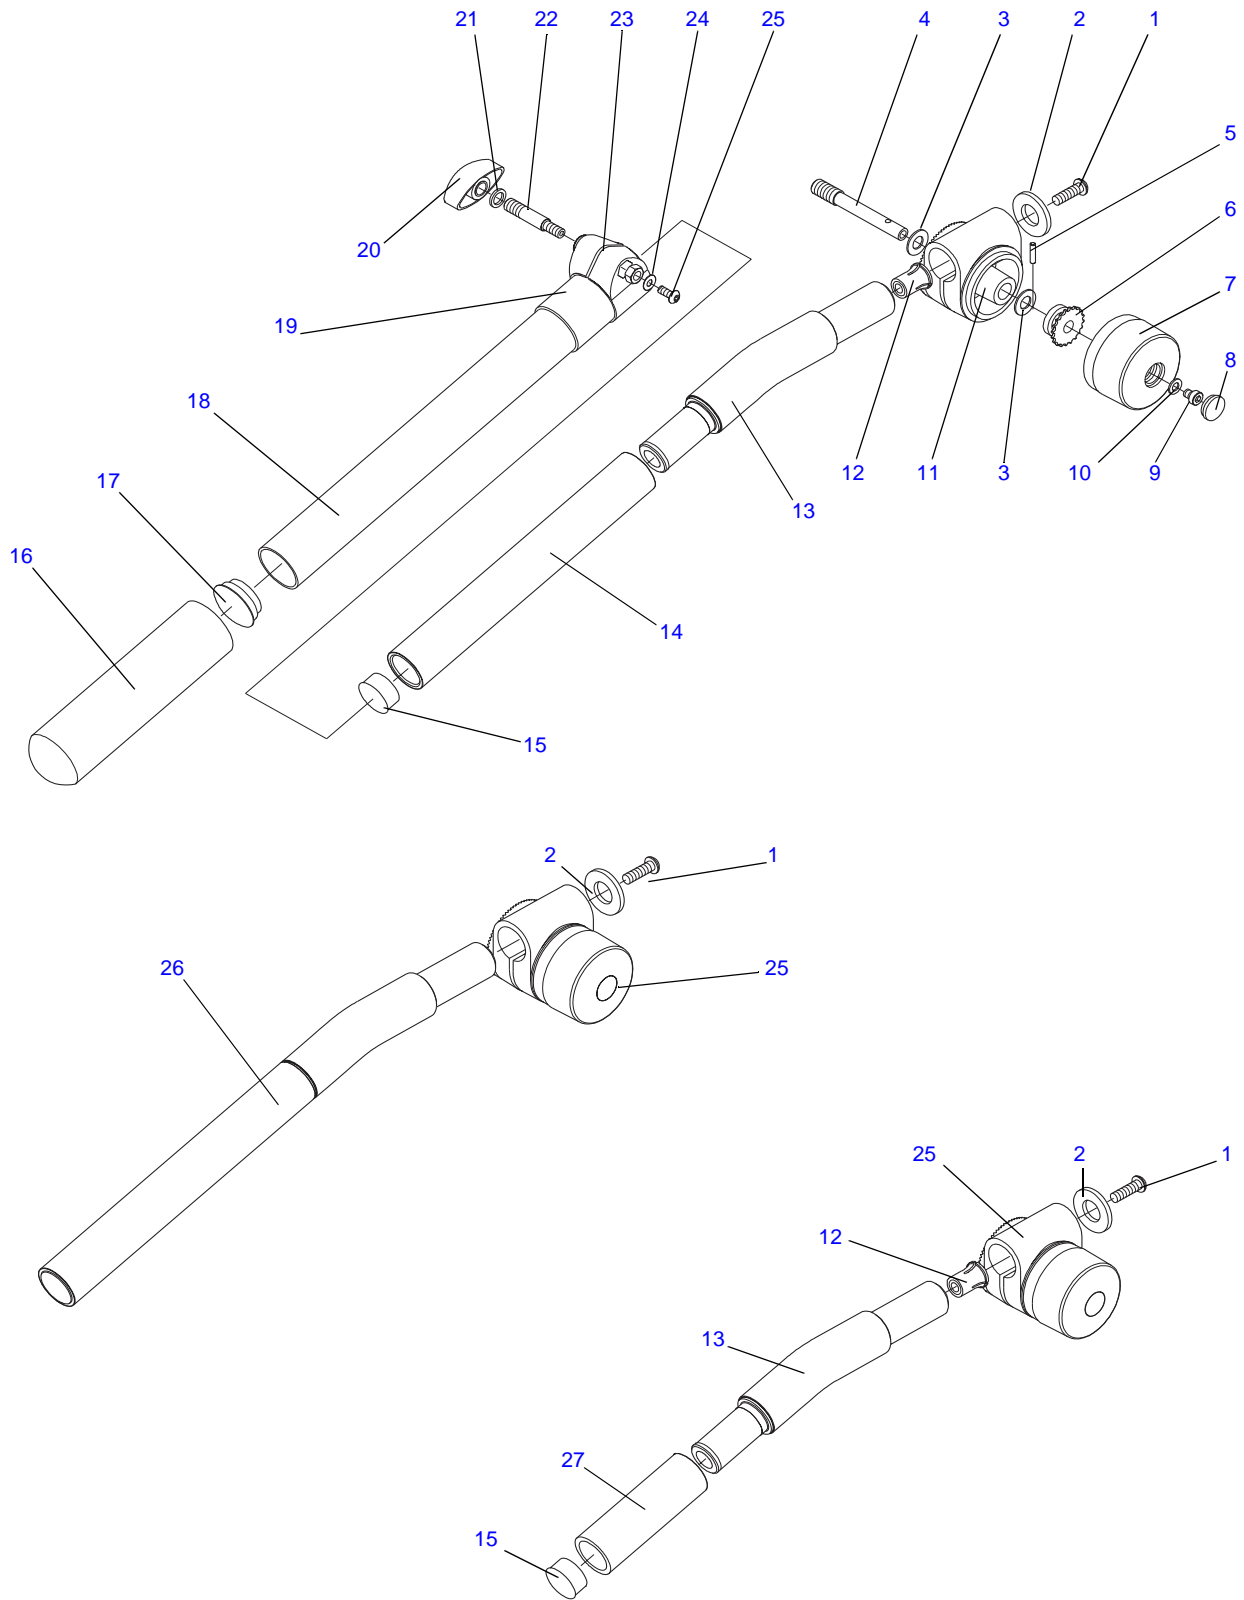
Vector 700/700H Pan and Tilt Head - Platform Assembly
